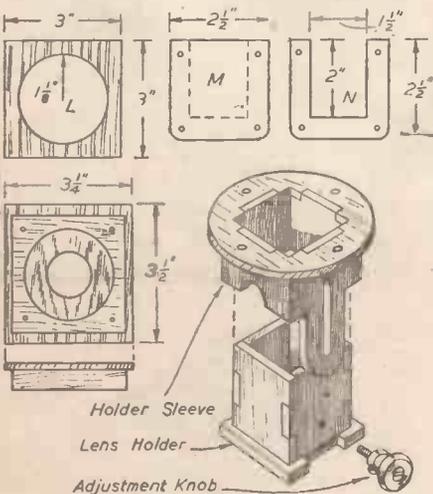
Perspective view of lens holder and sleeve, with details of lamp house top and vent covers.
